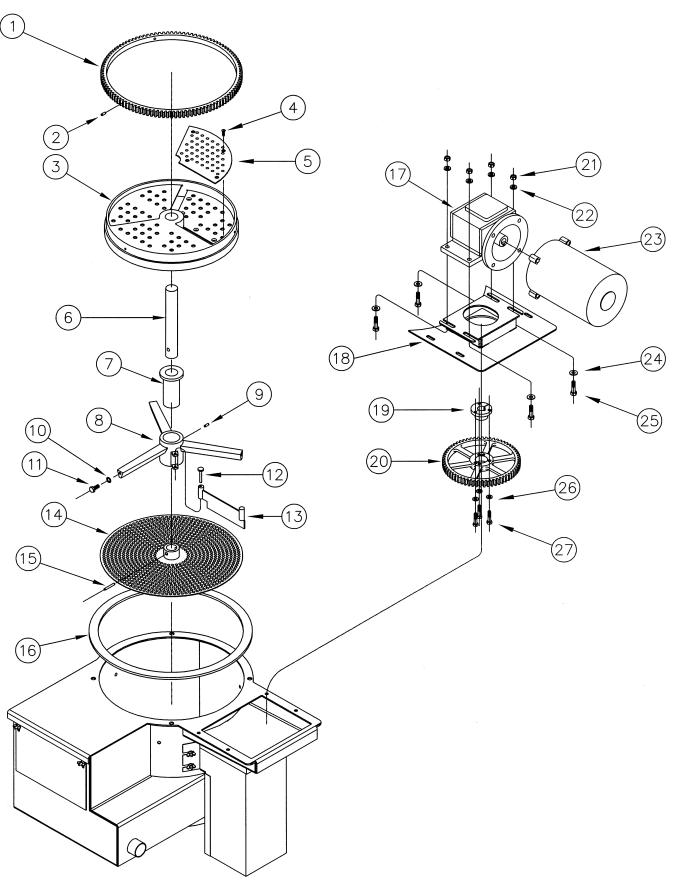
Cutter, Water Tank and Drive Gear Assembly
